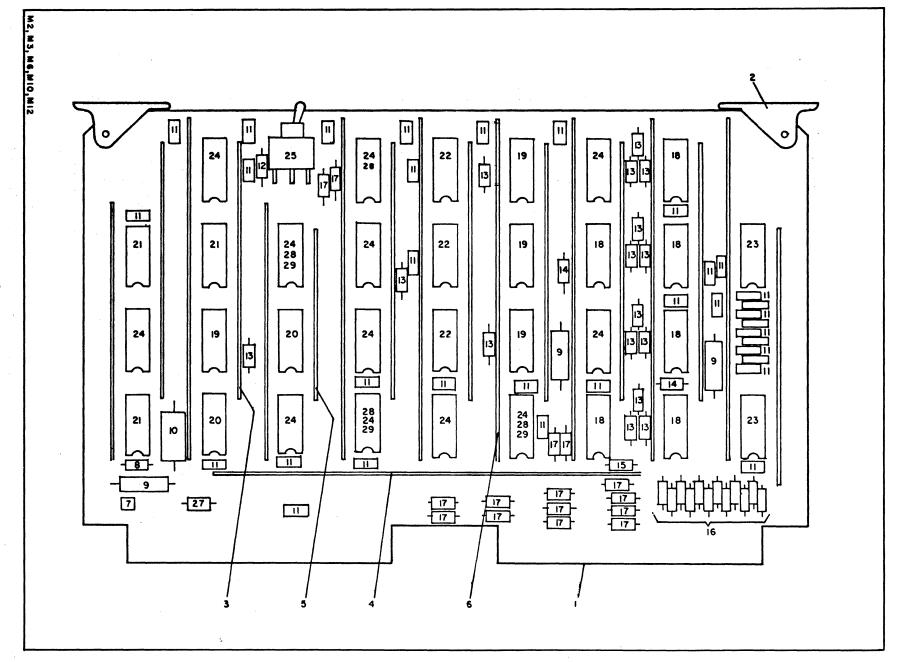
P.C. ASSEMBLY - Control Card
